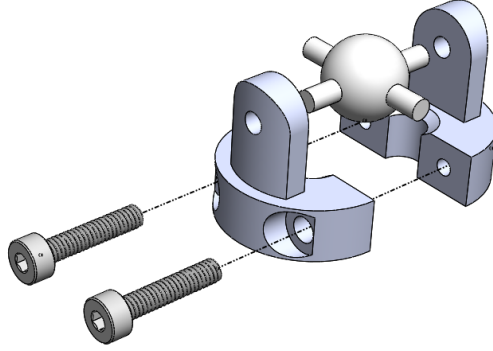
Exploded view of shaft coupler converging on the u-joint ball.
